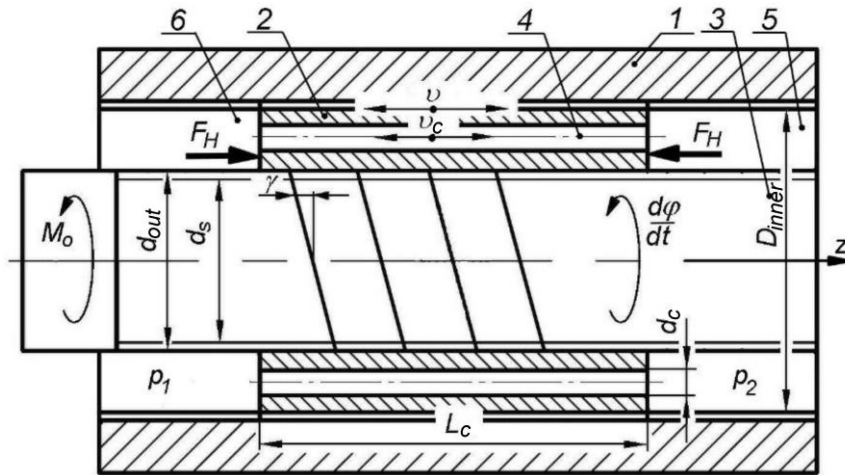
Operation principle of the hydraulic vibration damper in the torsionally flexible metal clutch, where: 1 - housing, 2 - movable element (nut), 3 - screw, 4 - holes, 5, 6 - clutch internal chambers [9].
